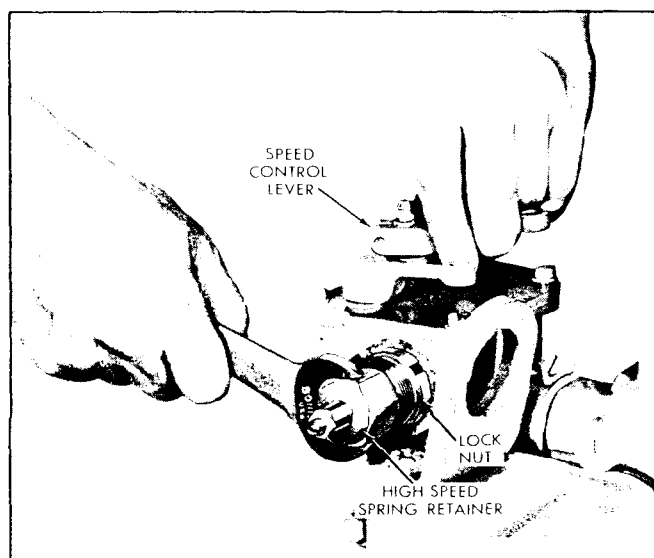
Adjusting Maximum No-Load Engine Speed
